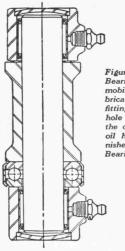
The Needle Bearings in this automobile king pin are lubricated with Alemite fittings through an oil hole in the center of the outer shell. These oil holes can be furnished on all Needle Bearings.
